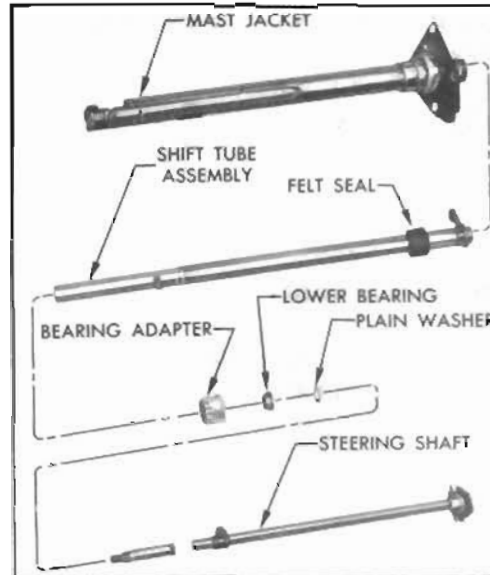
Disassembly of Lower Portion of Automatic Transmission Mast Jacket
